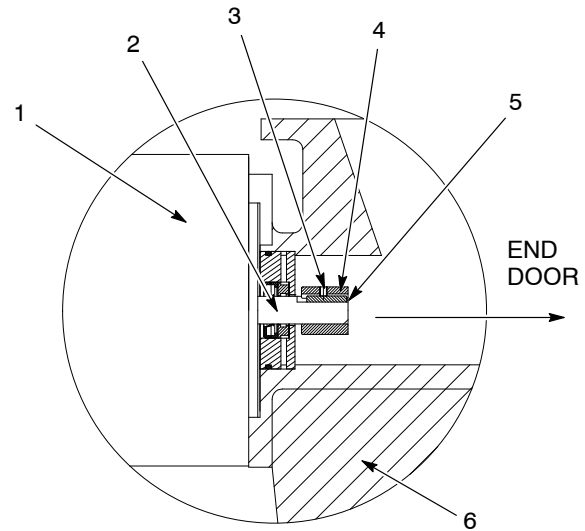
NRPS-100 Rotary Sieve Housing with a Male Hex Adapter (Section view shown with rotor removed)
